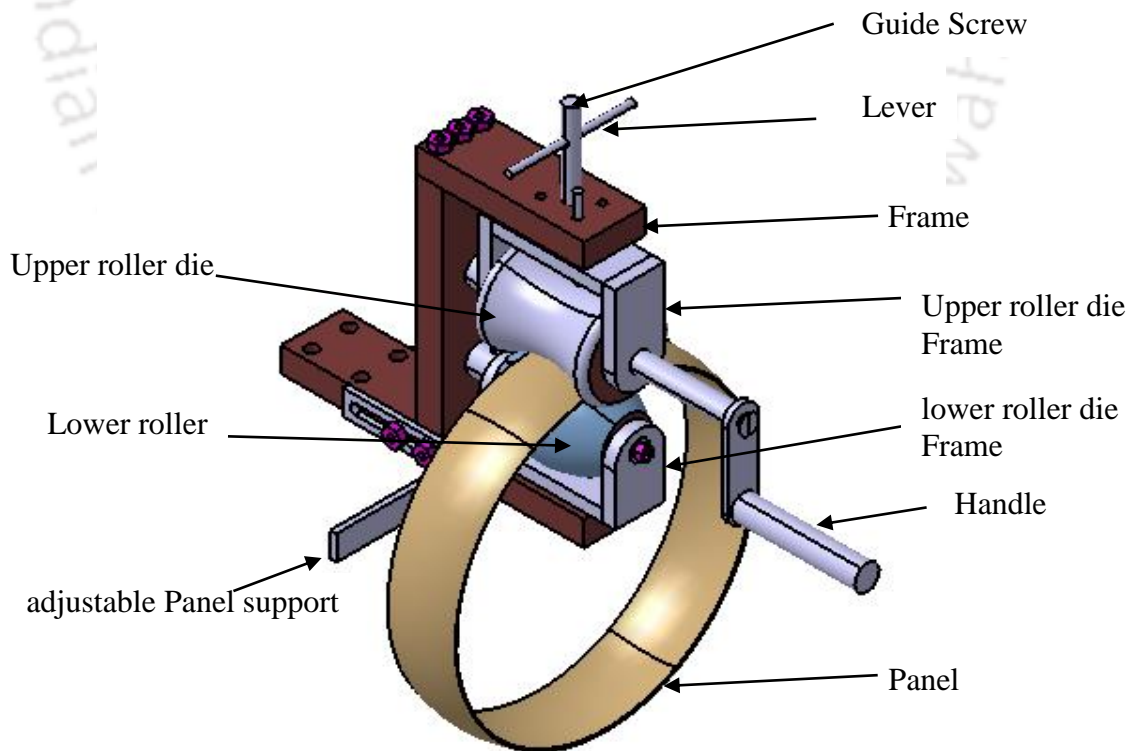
CAD model of shaping tool concept2 with panel loading condition
